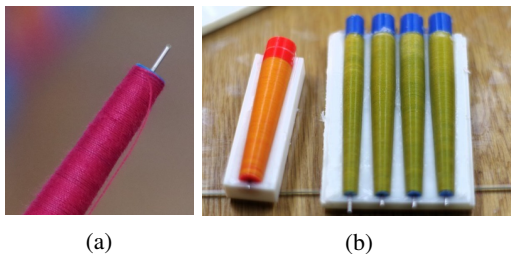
Actuator manufacturing. a) thread winding for reinforcement, b) actuators in mold, external silicone layer cured.
